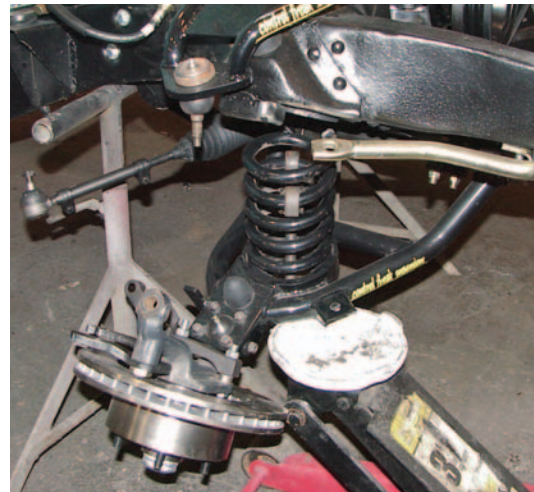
With the coil spring compressed, place a floor jack under the lower control arm and remove the upper ball joint nut and cotter pin. With a ball joint splitter, disconnect
